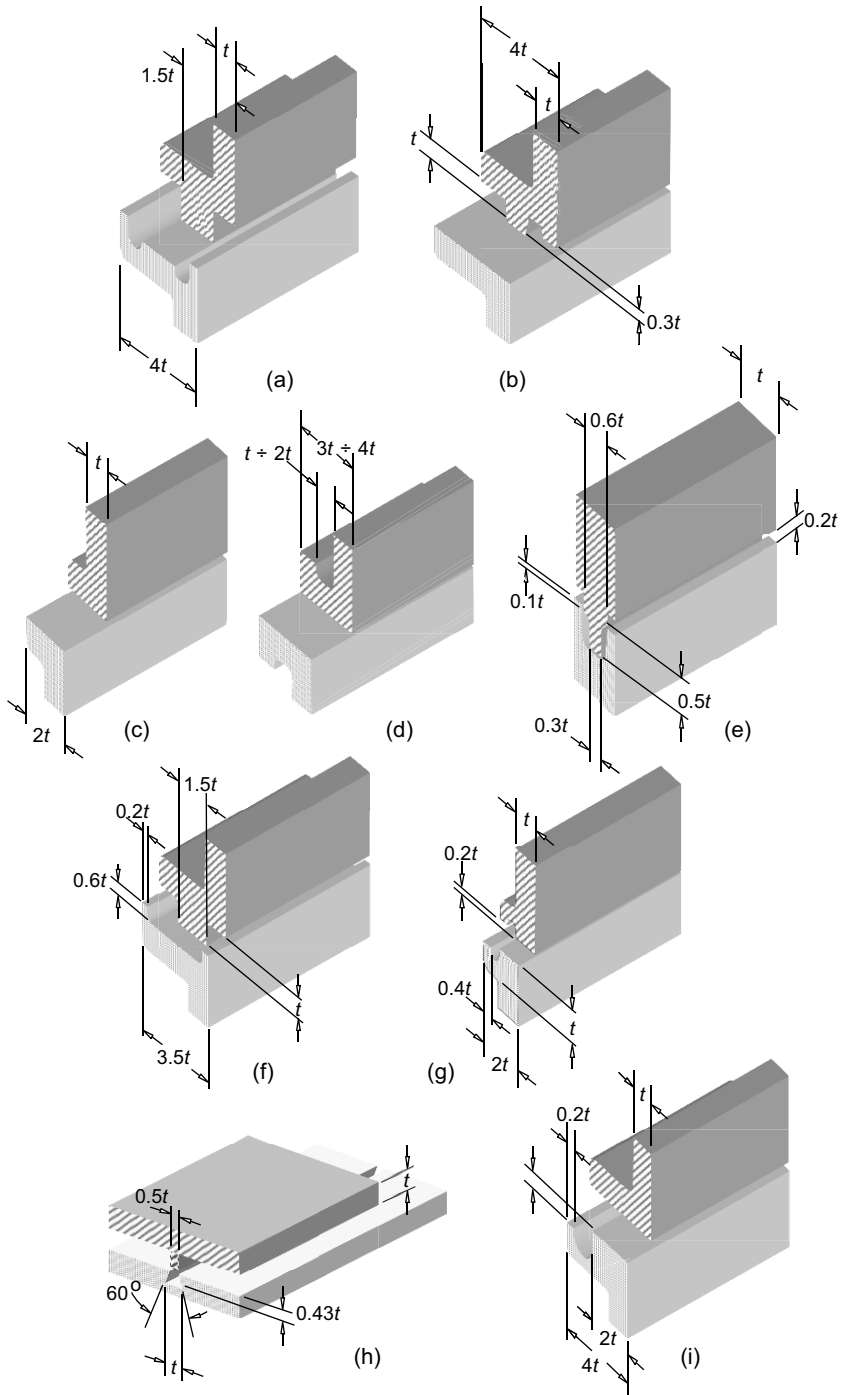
Vibration welding joint designs: (a) bench with flash traps; (b) straight bench; (c) tongue-and-groove; (d) double L; (e) ridged double L; (f) grooved bench; (g) double L with flash traps; (h) dovetail; (i) double L with single flash trap.
